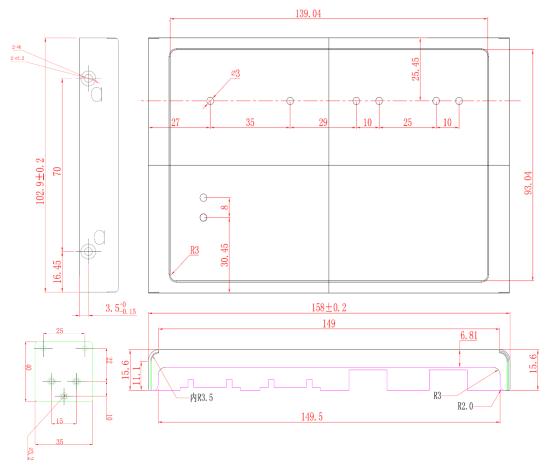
CANSwitch-AF2S2 installation mechanical dimensions
